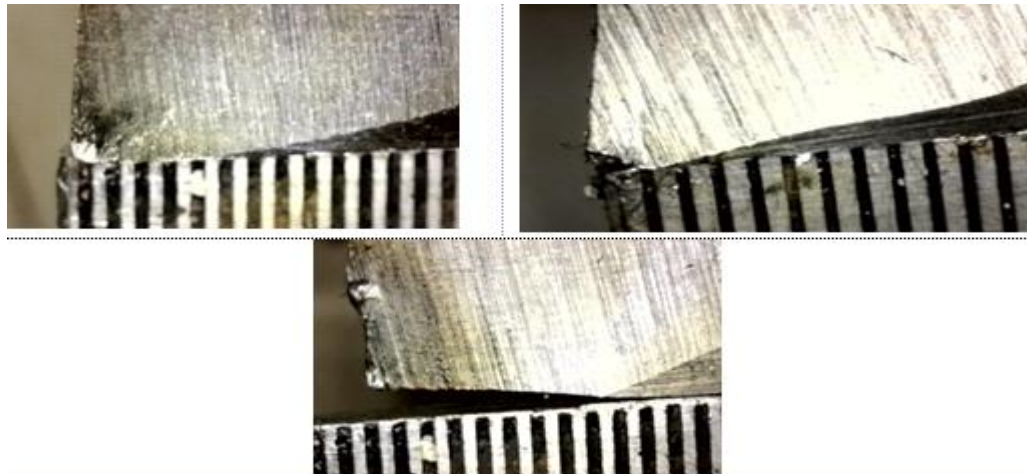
Tool Wear Measurement Results Using Digital Microscope
